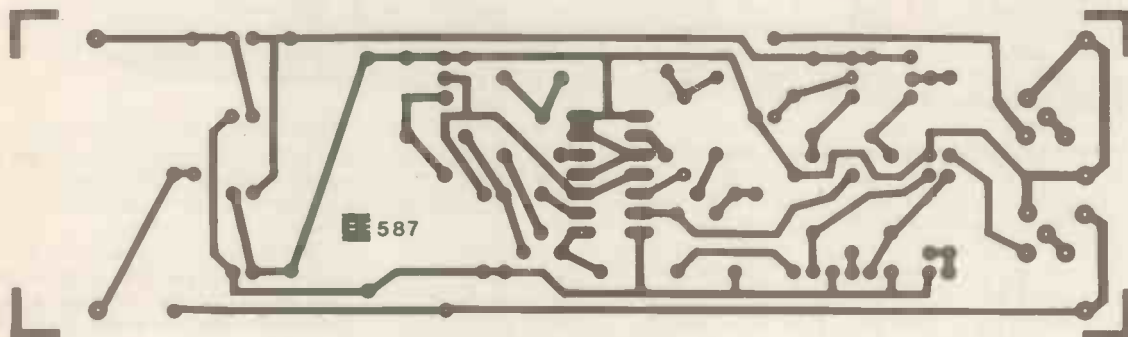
Full size printed circuit board master foil pattern and component layout. It is recommended that IC1 be mounted in a 14-pin d.i.l. socket on the board.
